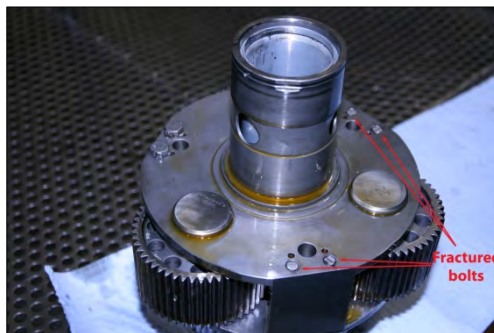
First stage reduction carrier showing the location of the under-head fractured bolts.
